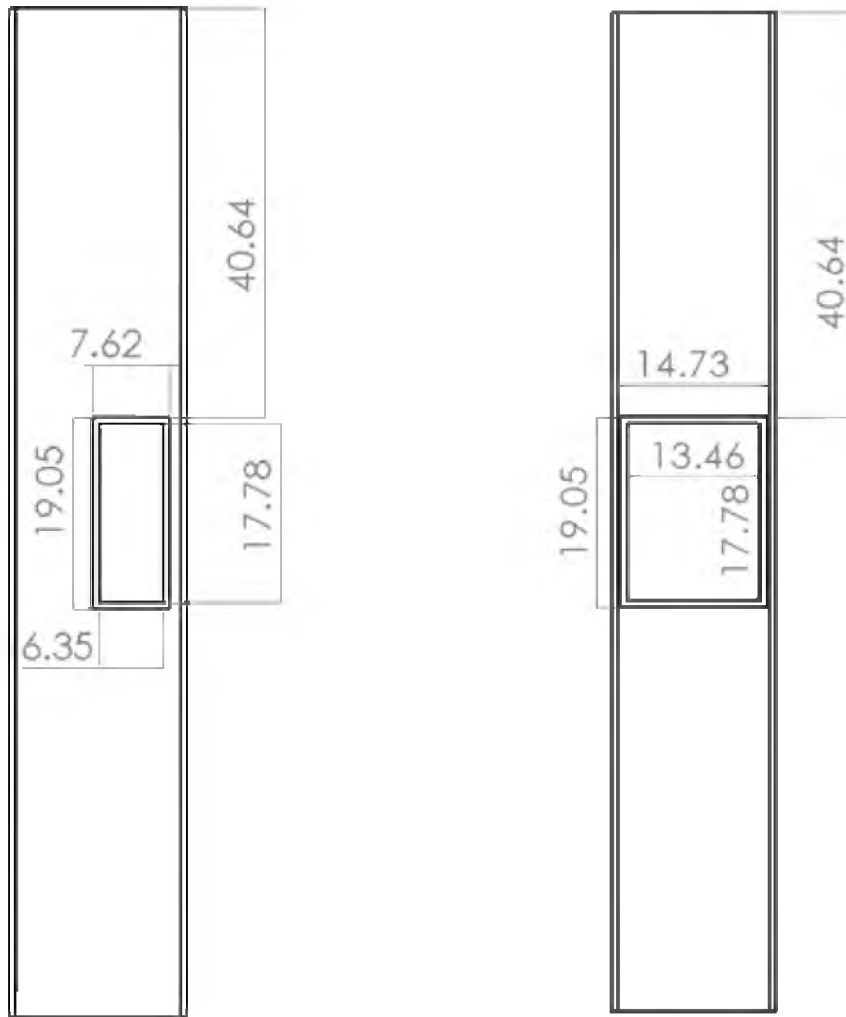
SolidWorks drawings of relevant test section sides. a) (left) Bottom side of the test section. b) (right) "Window side" of the test section.
